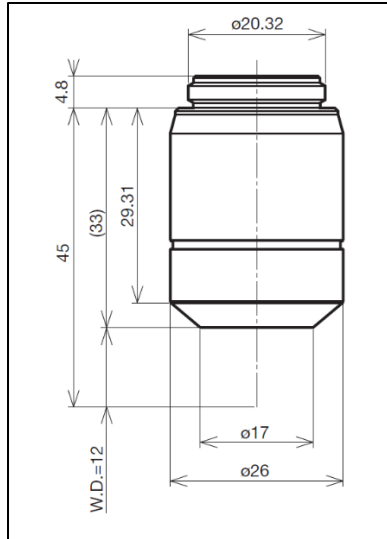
Mechanical Drawing of the LMPLFLN20X Objective [27].
